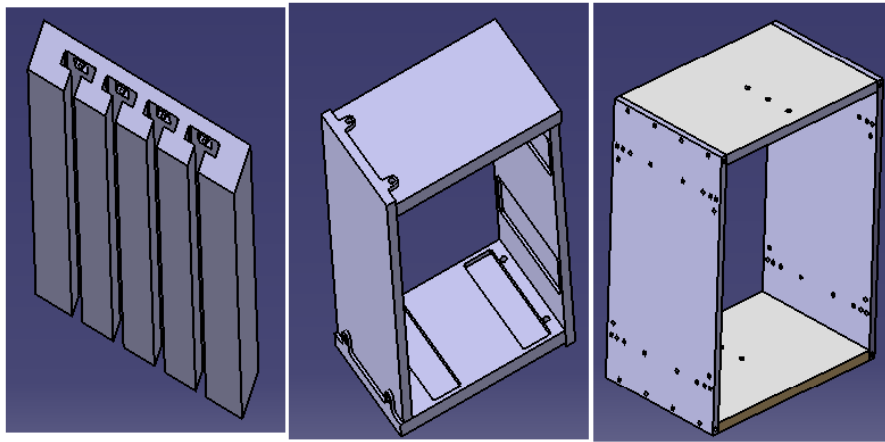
On the left and middle, first housing designs. On the right, final laminates conforming the housing.
